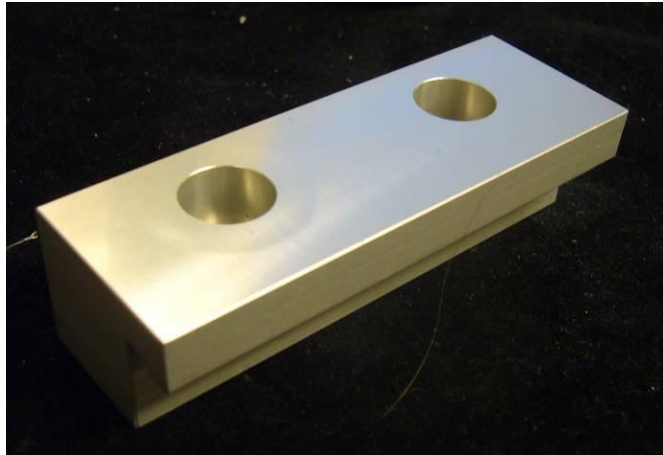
Toe clamp for mounting z-axis to carriage of x-axis
